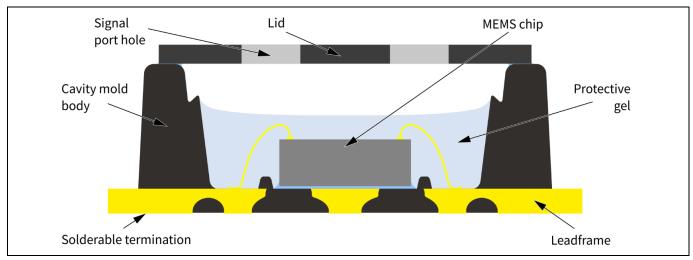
Schematic showing the inner setup of a DFN pressures sensor package with no-lead terminations.
